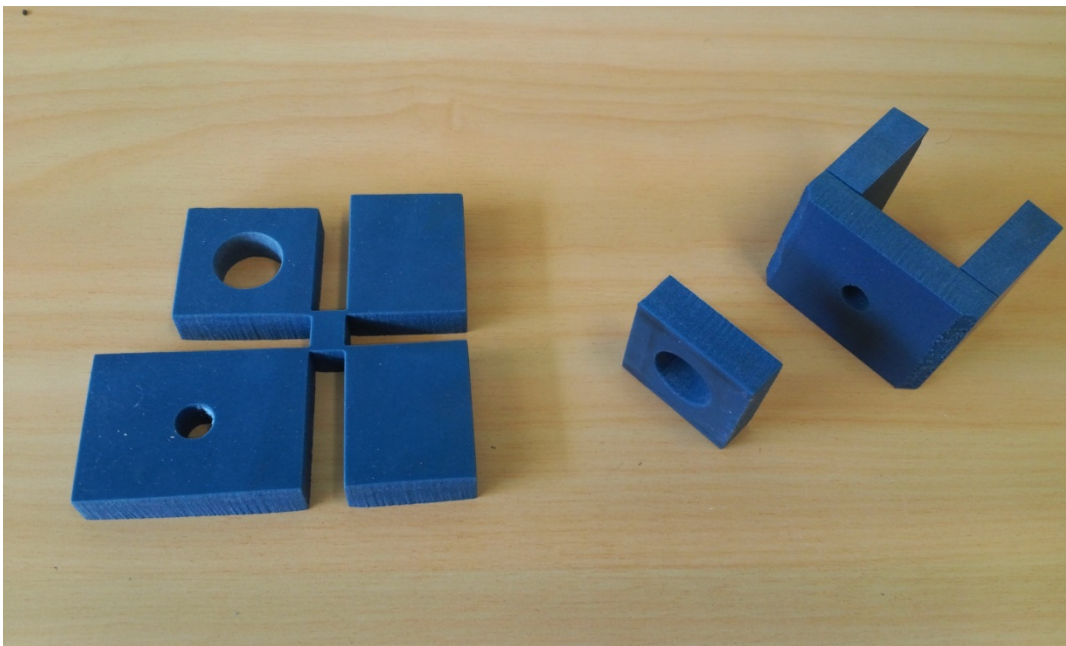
Sylomer foam pads. The four-pad set after water jet cutting (left), the final assembly of the U-shape Sylomer (right). Note the chamfer on the front corners of the U-shape Sylomer assembly to allow a better fit into the Cup Bracket.
